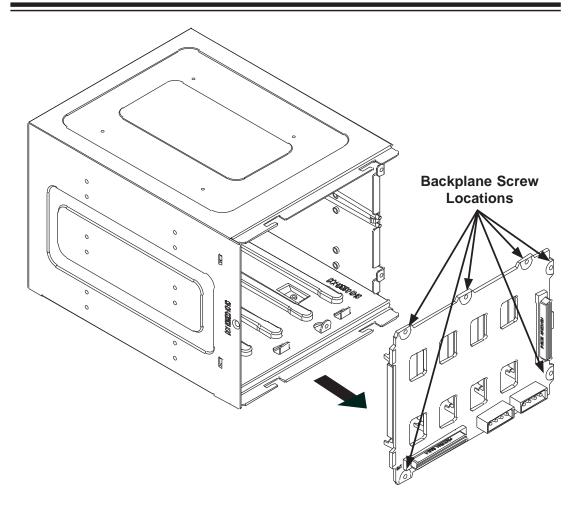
Removing Mobile Rack Backplane (Optional)
